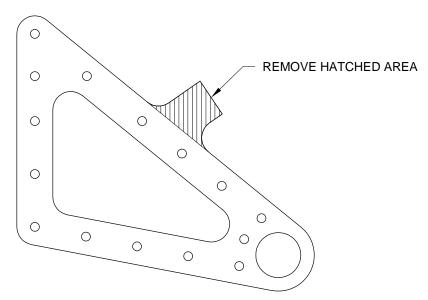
HINGE BRACKET SPACER TRIM FOR OUTBOARD AILERON HINGE BRACKET ASSEMBLIES
